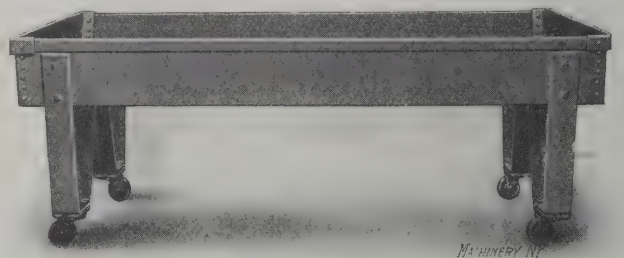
Box for Material in Process of Manufacture, Tools and Finished Stock
